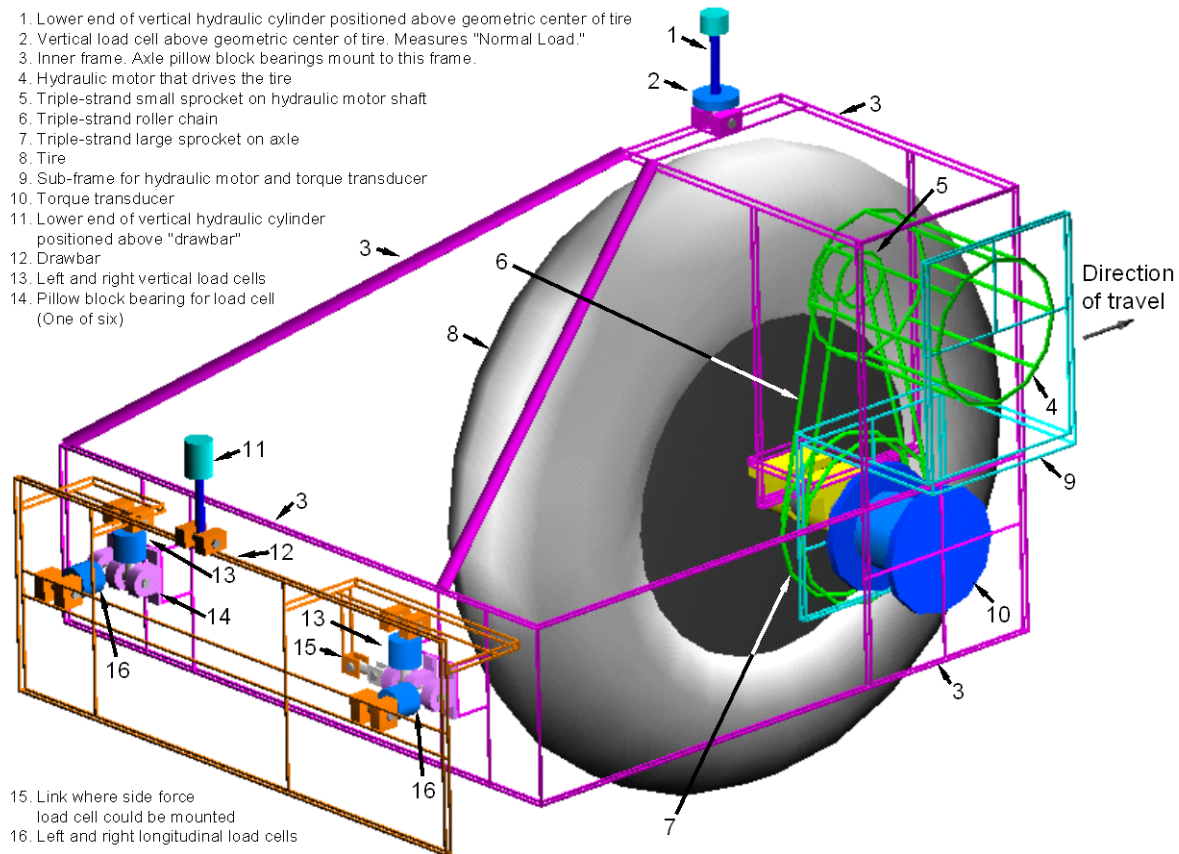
Drawing of the force and torque transducers and the frame assemblies to which they are mounted for the TRV. For clarity, components of frames 3, 9, and 12, and parts 4, 5, and 7 are shown here as stick parts. Actual parts are more substantial as shown in figure 1. The length of link #15 is in the lateral direction.
